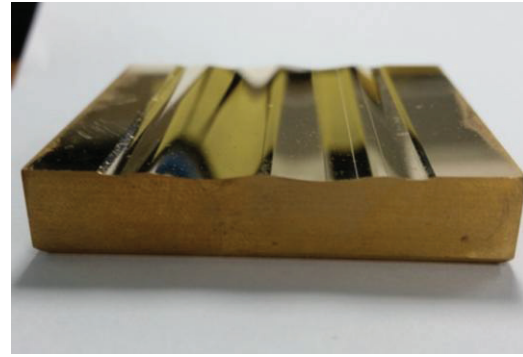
Machined mold having sinusoidal patterns with a compensated tool path
